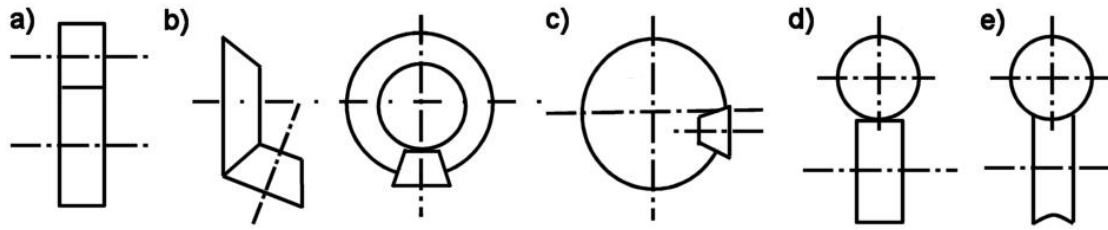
Schematic views of basic gear types a) spur gear, b) bevel gear, c) offset bevel gear, d) worm gear and, e) crossed axis helical gears.
